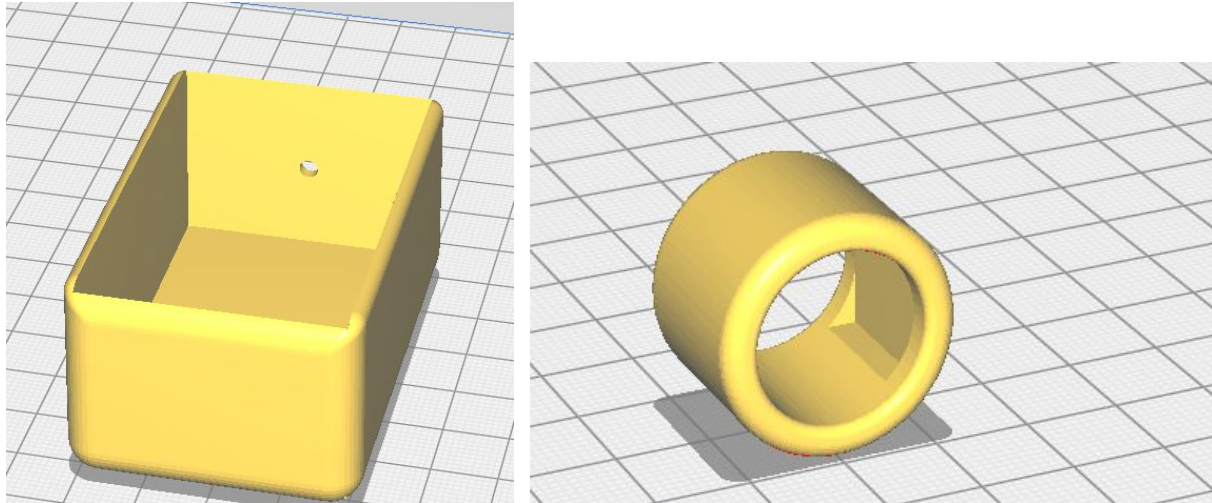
Models of a watch case (left) and ring (right) ready to be 3D printed and encase our components. All modelling and dimensioning were done in solidworks to ensure that the hardware would sit flush (watch case: 69mm x 44mm x 32mm, ring: 20mm x 25mm x 25 mm).
